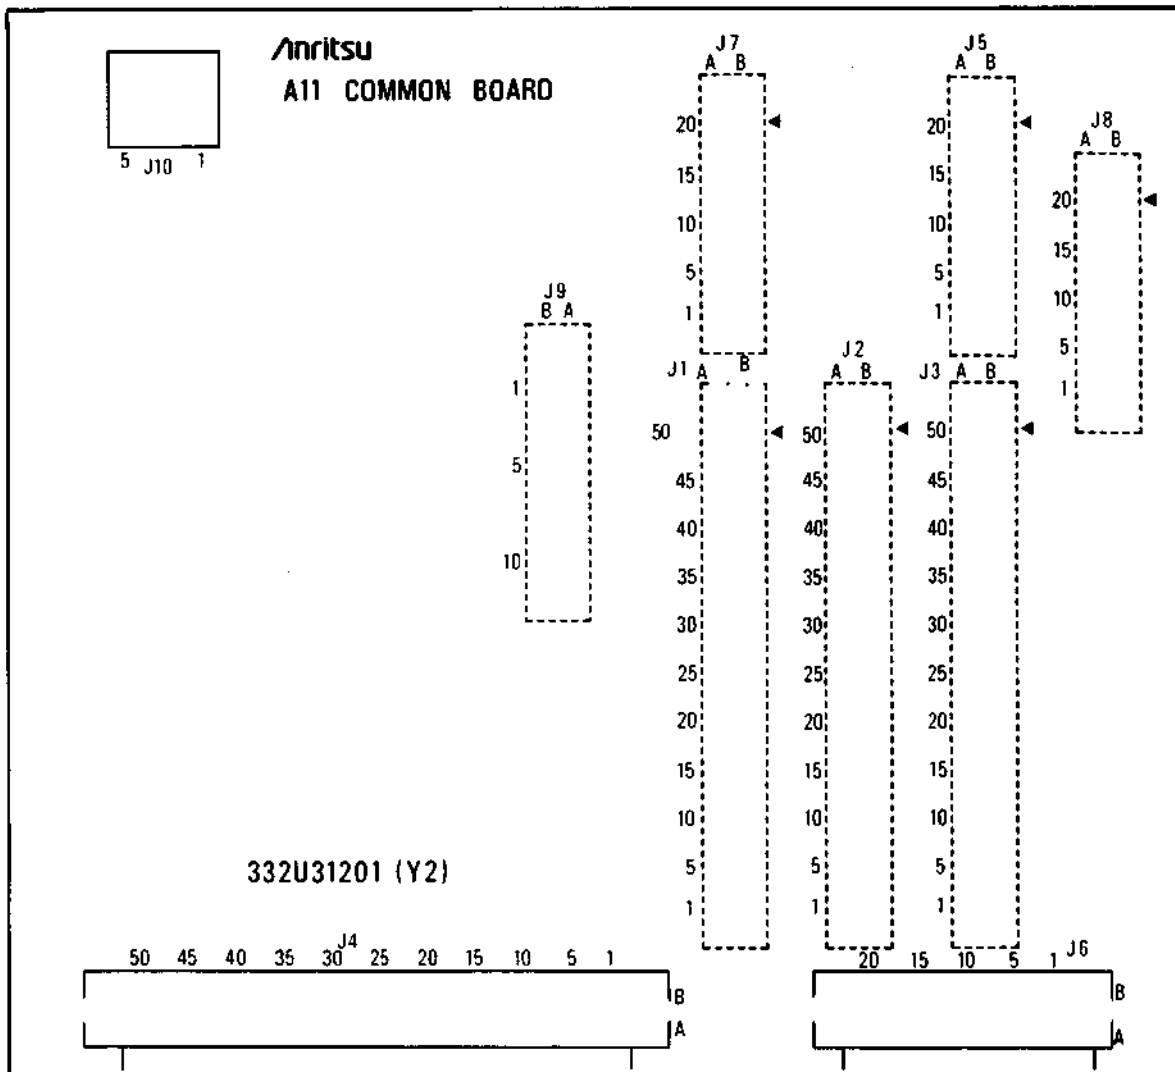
(1/2) A11 COMMON BOARD PC-Board Parts Layout (Component Side) 38
